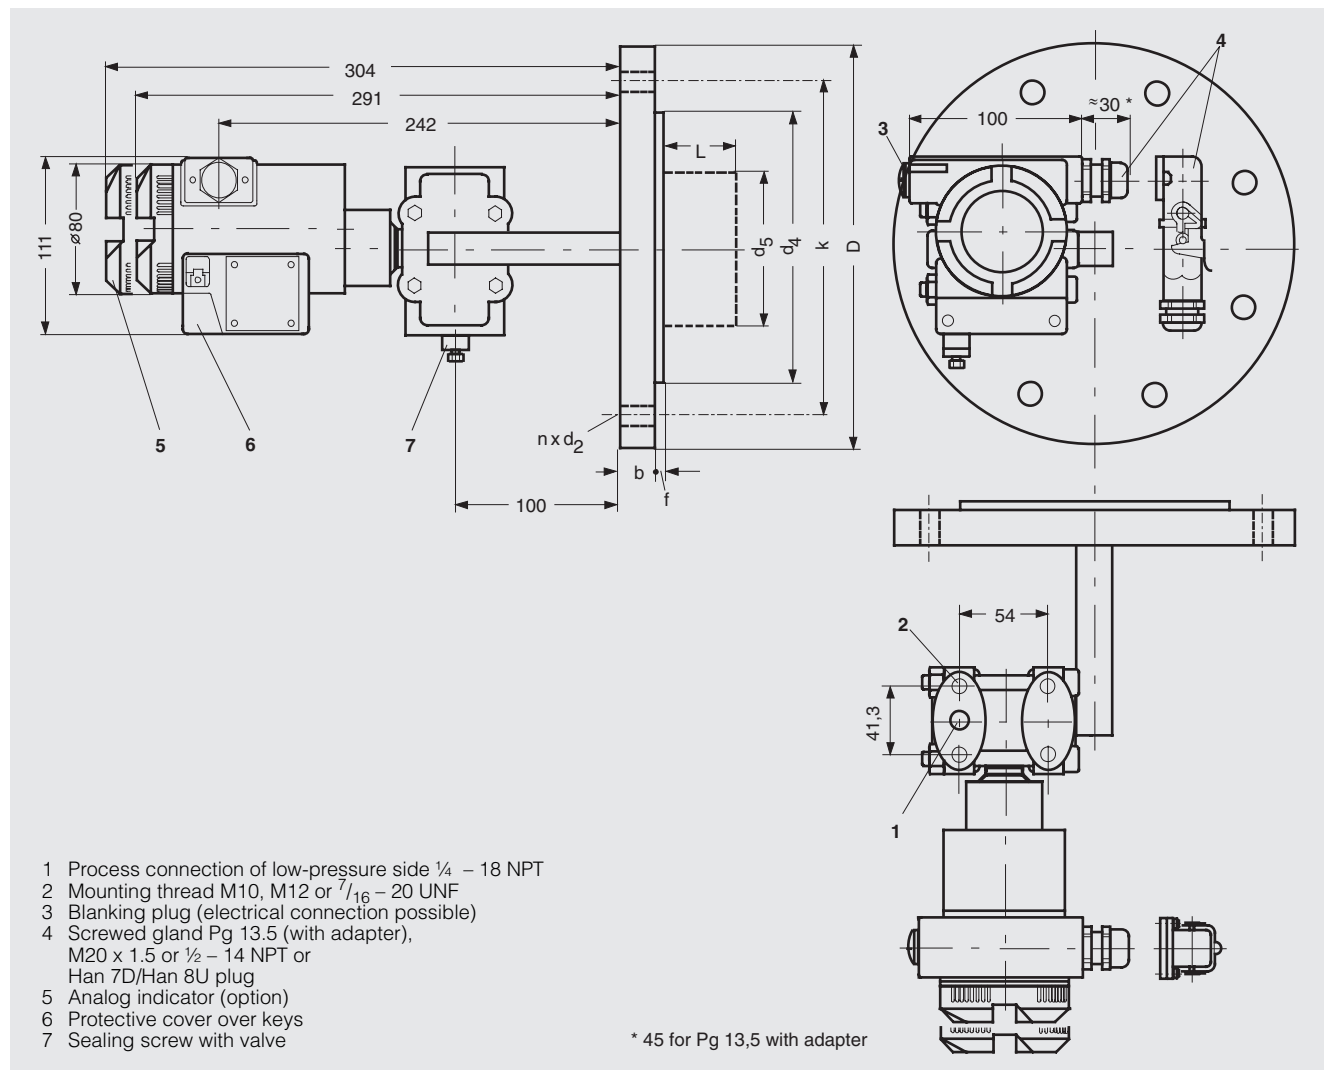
/28 Dimensions of HK series (transmitter including mounting flange)
